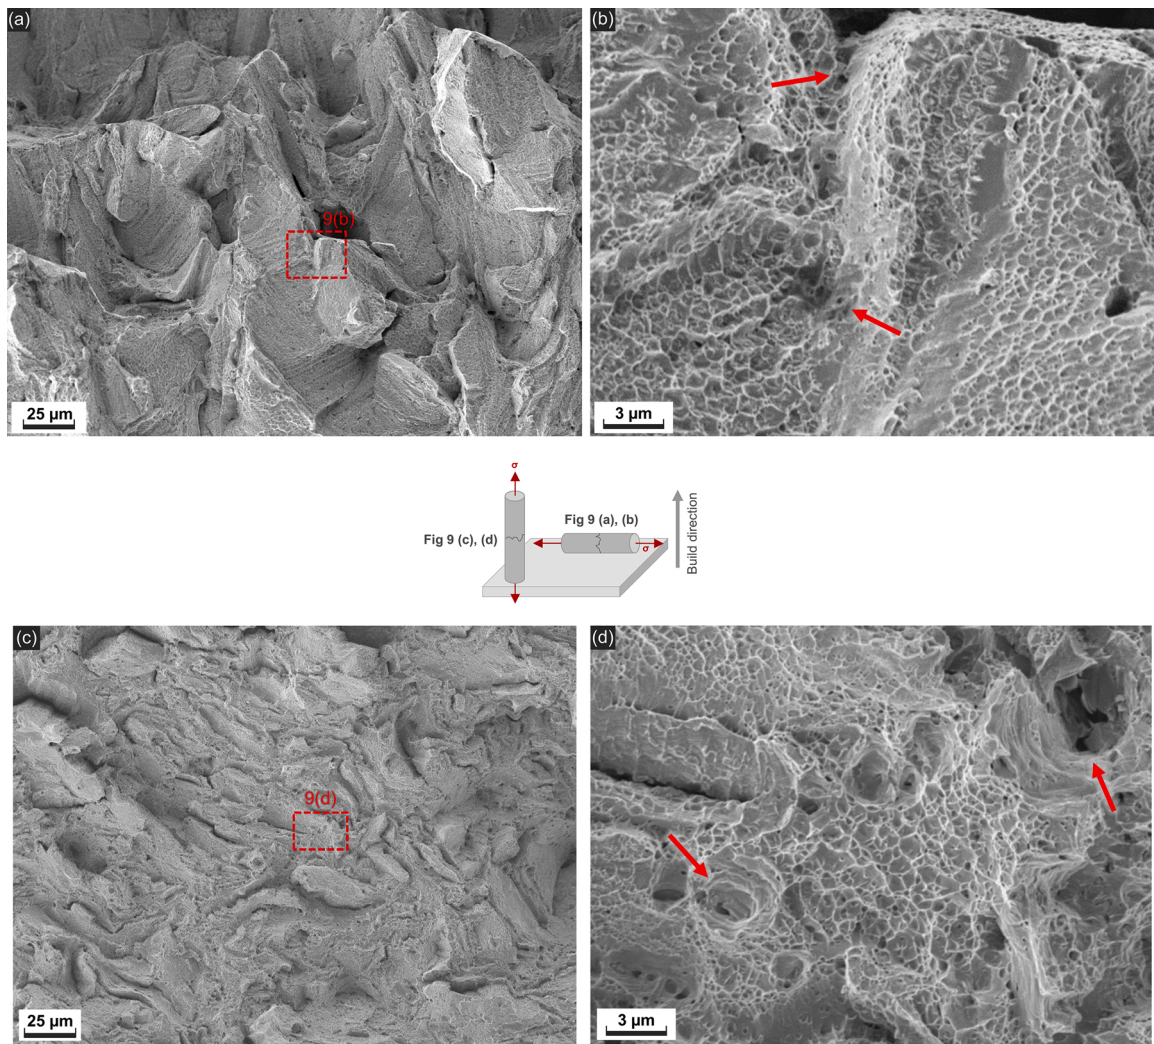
Fracture surfaces of heat-treated tensile specimens tested at room temperature (a) horizontally built specimen; (b) magnified area showing grain boundaries; (c) vertically built specimen; (d) magnified area showing carbide particles.
